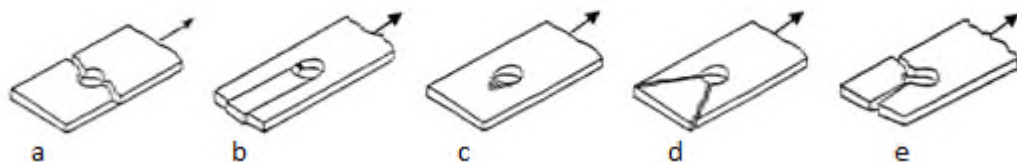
Bearing test failure modes for ASTM D 5961/D 5961M-05: (a) lateral, (b) shear out, (c) bearing, (d) tearout, (e) cleavage. From [1]
